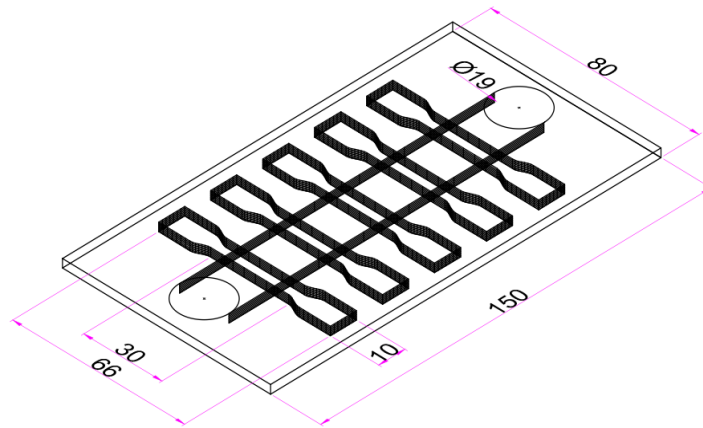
Dimension of TIG+FSP welded tensile test specimen
